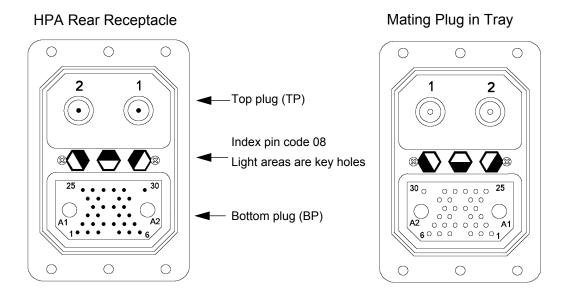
HPA Receptacle, Face View of Engaging End. Index Code is 08
